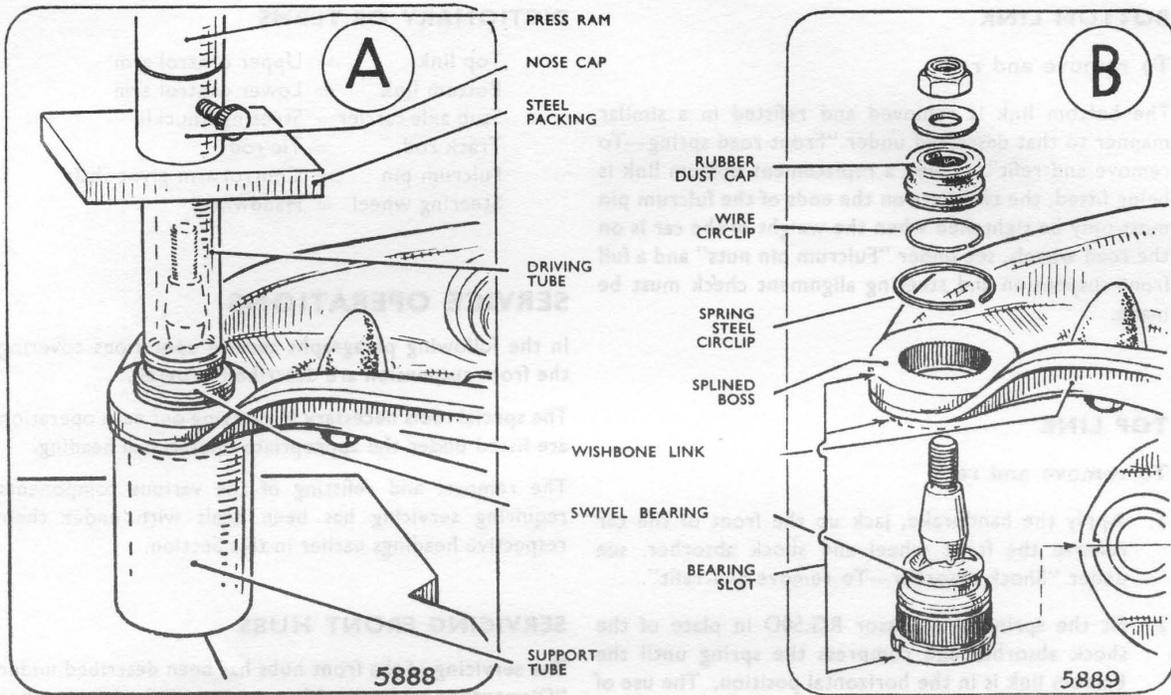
"A", pressing out top swivel bearing using special tool, RG.319 and "B", showing correct position of alignment slot when refitting
